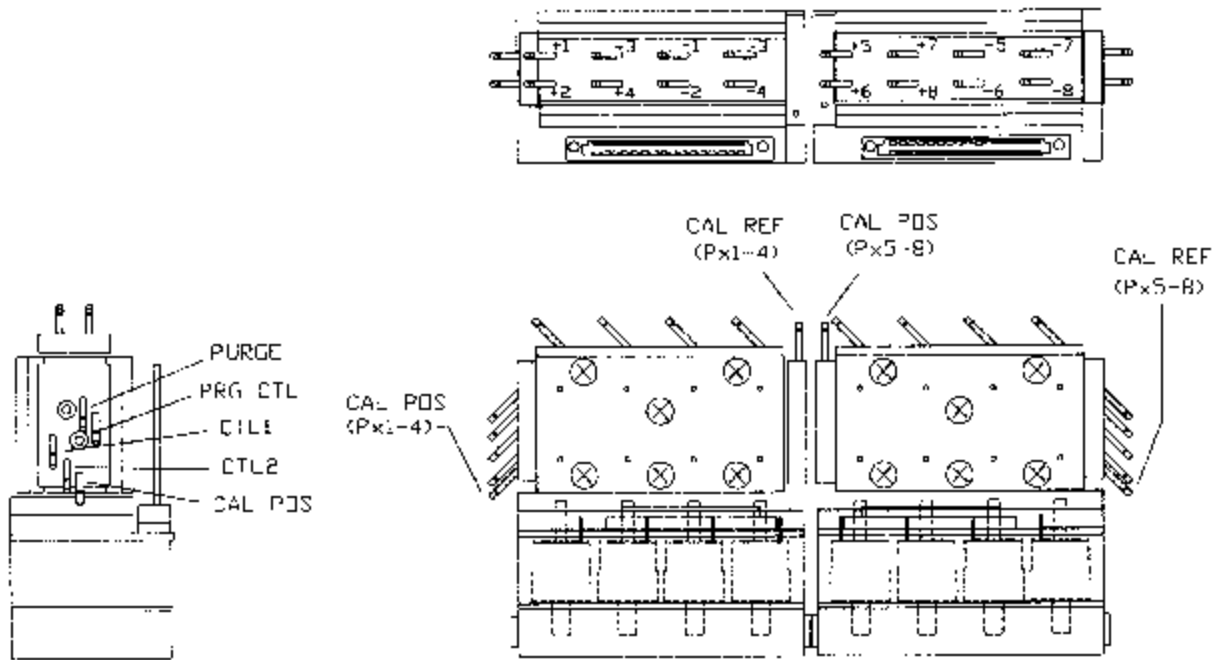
Typical ZOC16TC/8DPx Valve Assembly
